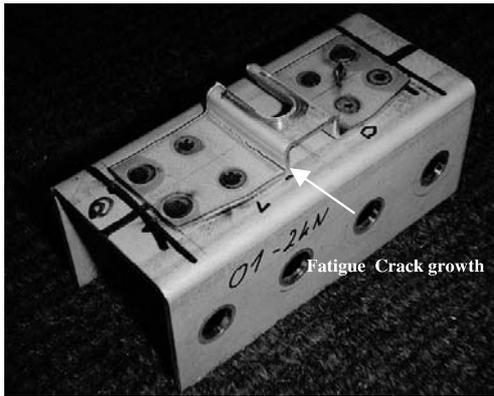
Fatigue crack at root region of holder ($t = 1.5$ mm)
